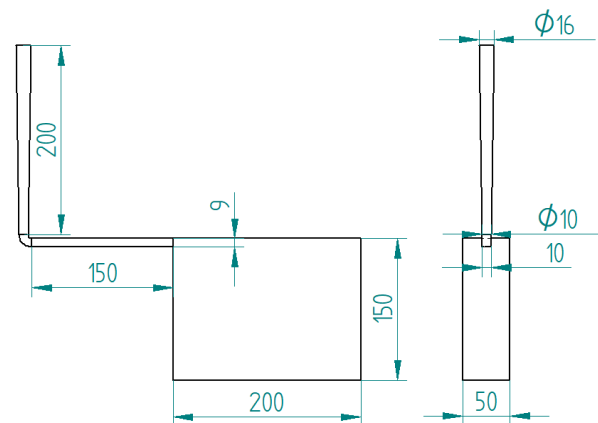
Dimensions of the straight sprue gating system in relation to the casting.
